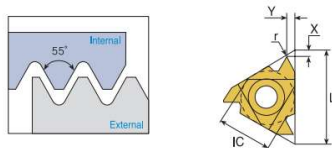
Korloy 14W IR 55° internal threading diamond insert [22]
